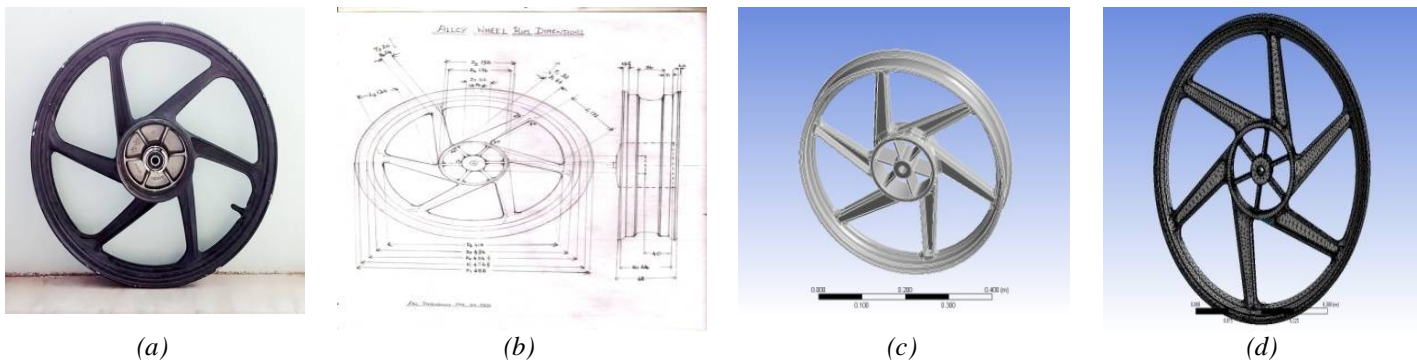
Modelling of Wheel Rim (a) Wheel rim used (b) Dimensions of Wheel Rim (c) 3D part Model of Wheel rim (d) 3D Meshing of Wheel Rim
